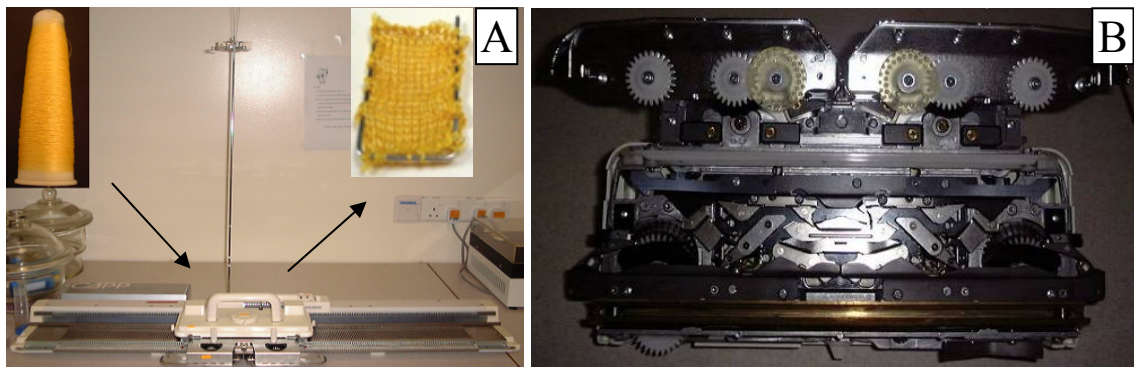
(A) Hand-operated knitting machine used for the fabrication of knitted silk scaffolds from silk yarns with (B) the complex knitting mechanism that would catch frayed degummed silk fibers causing damage to the knit.
